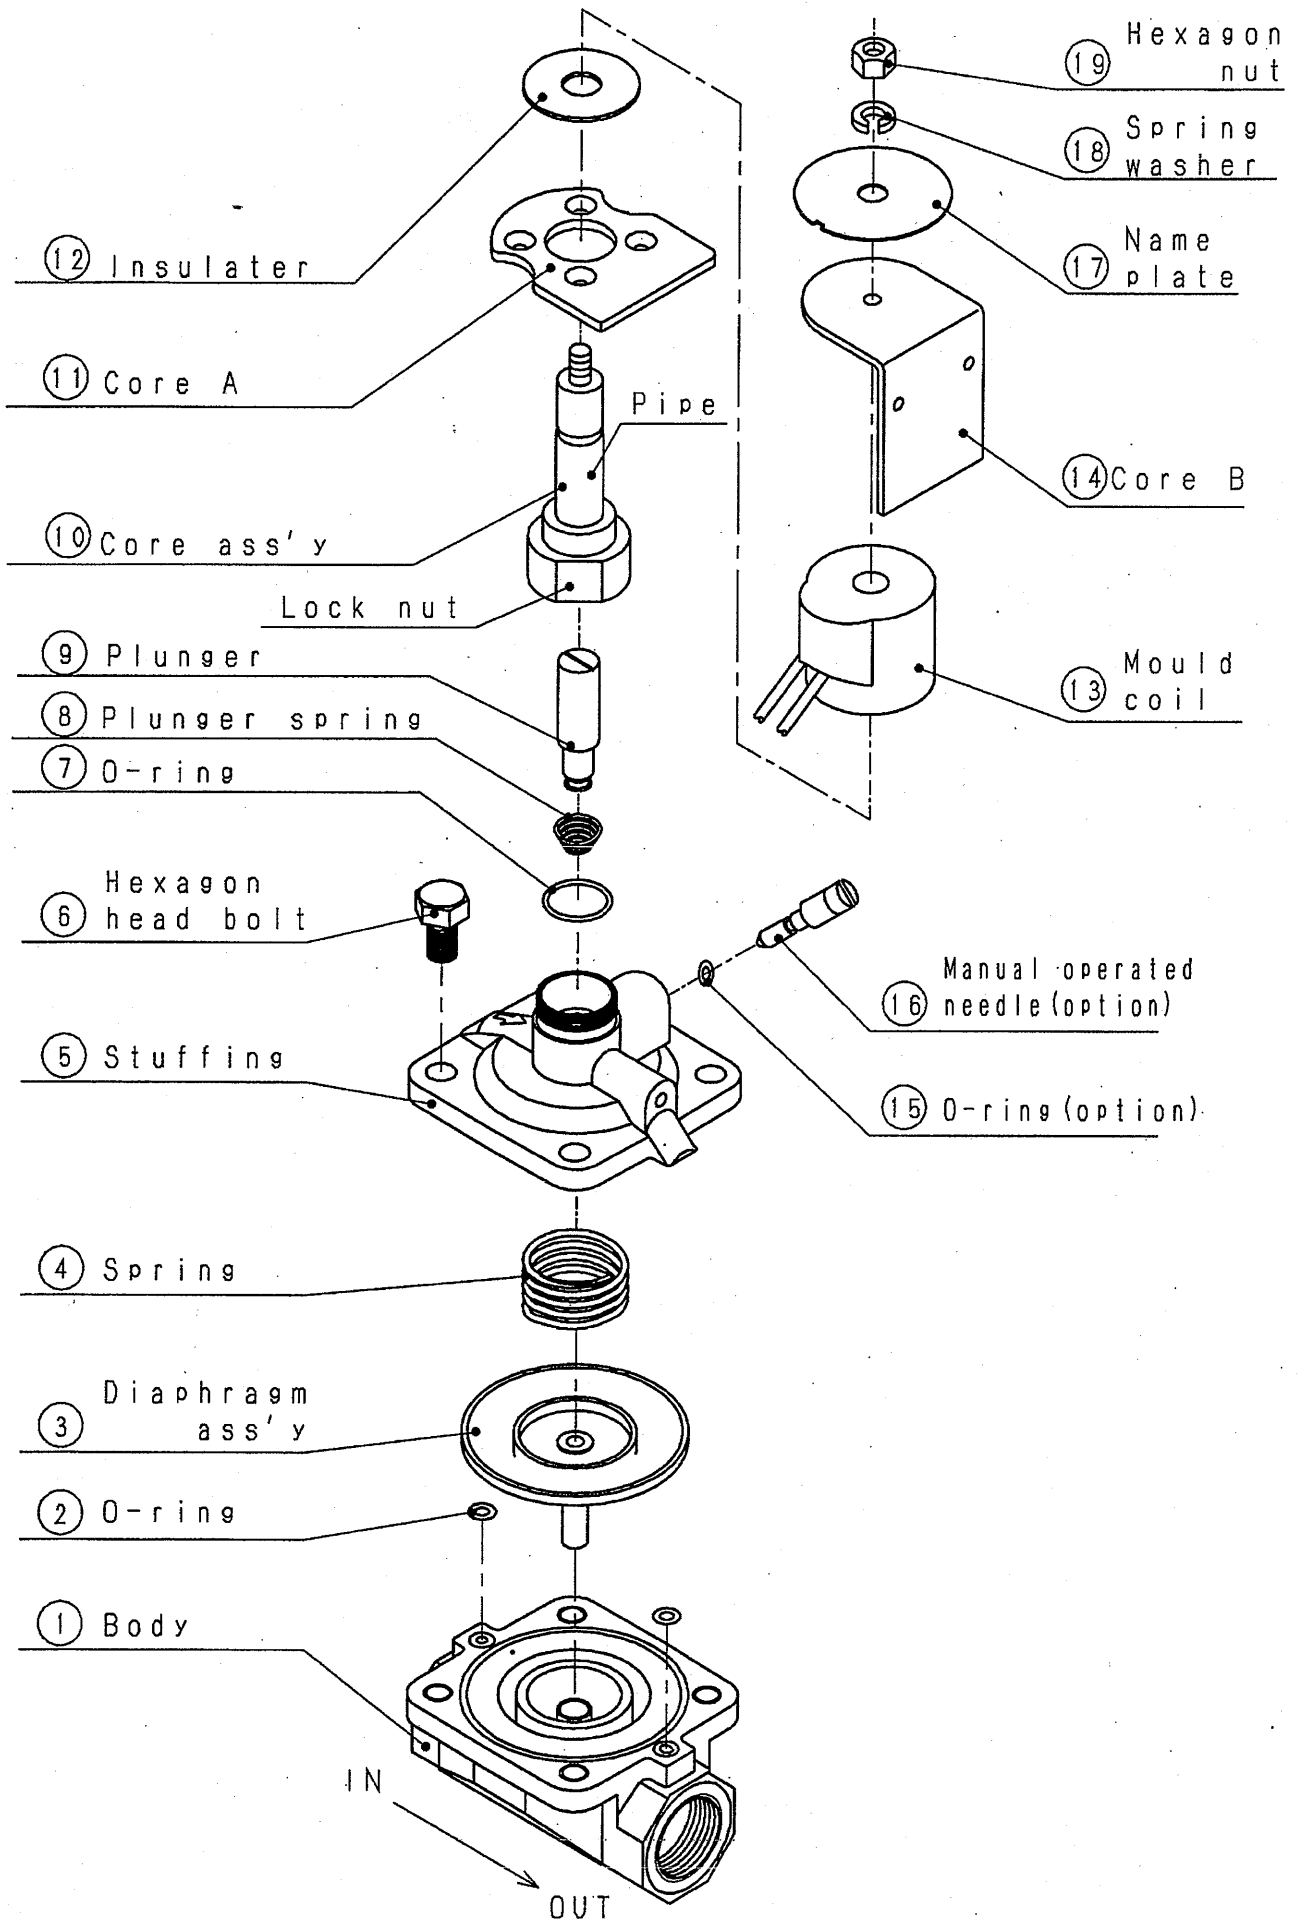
Disassembly drawing (Coil option symbol: 7A)
